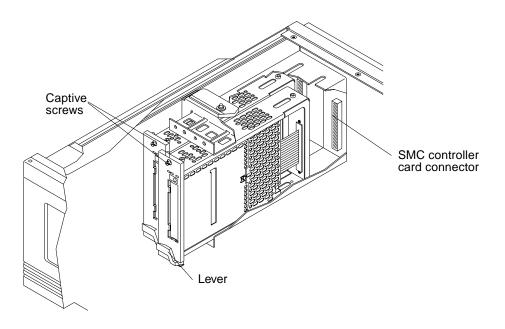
Disconnecting the Drive Carriers from the SMC Card
